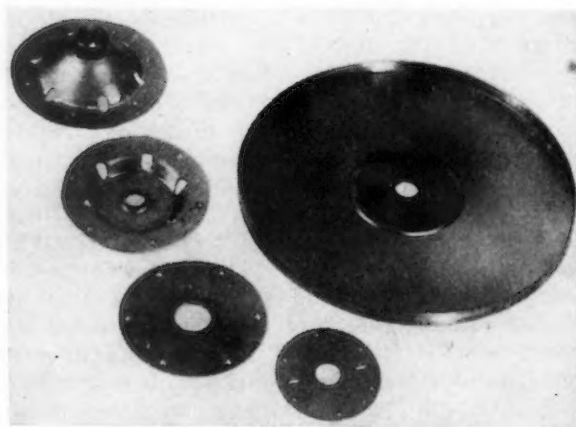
Four of the various types of mounting brackets used with the standard phonograph turntable shown at right. These brackets are projection-welded to the turntable with storage battery powered welders.
